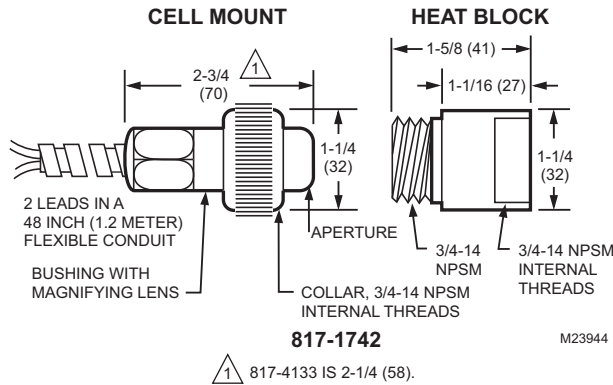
Infrared detector, mounting dimensions in inches (mm).
